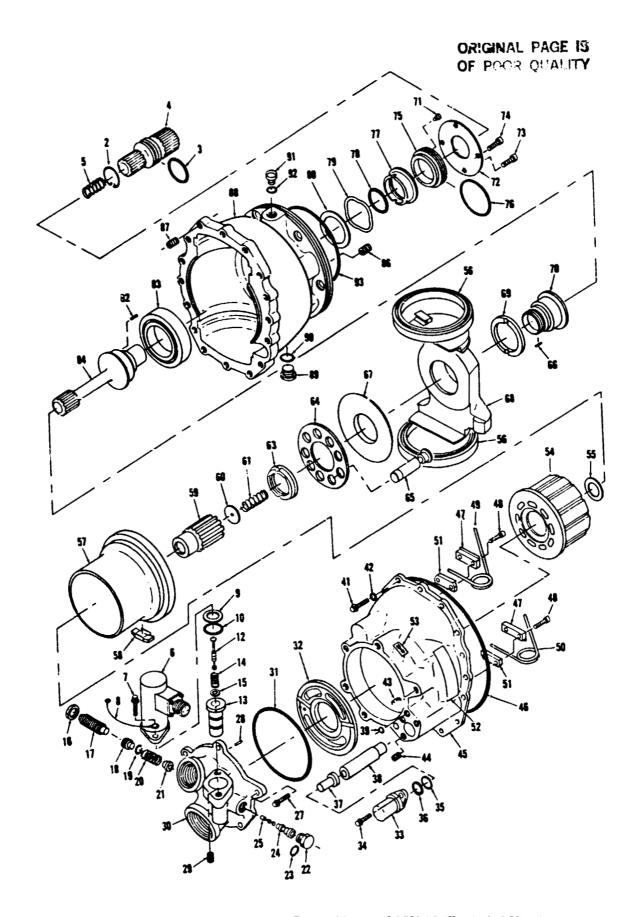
Hydraulic Pump, Model AP27V-10 (Exploded View)
